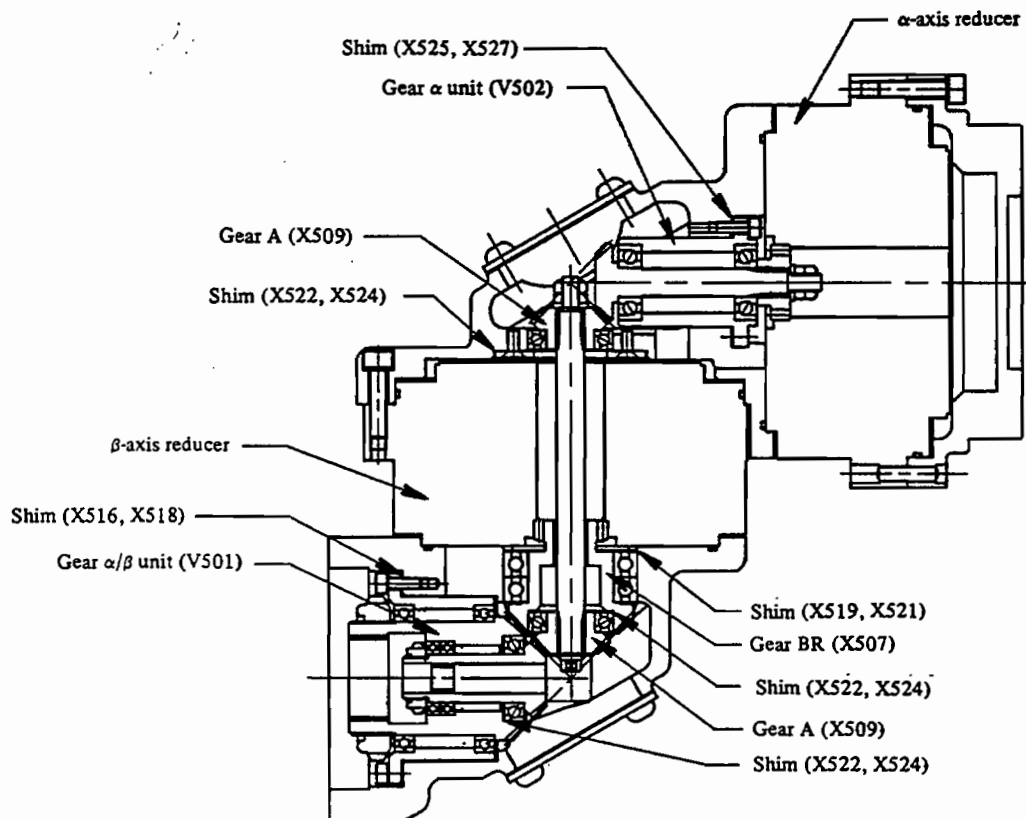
(c) Adjusting α/β -axis bevel gear backlash (offset wrist)
